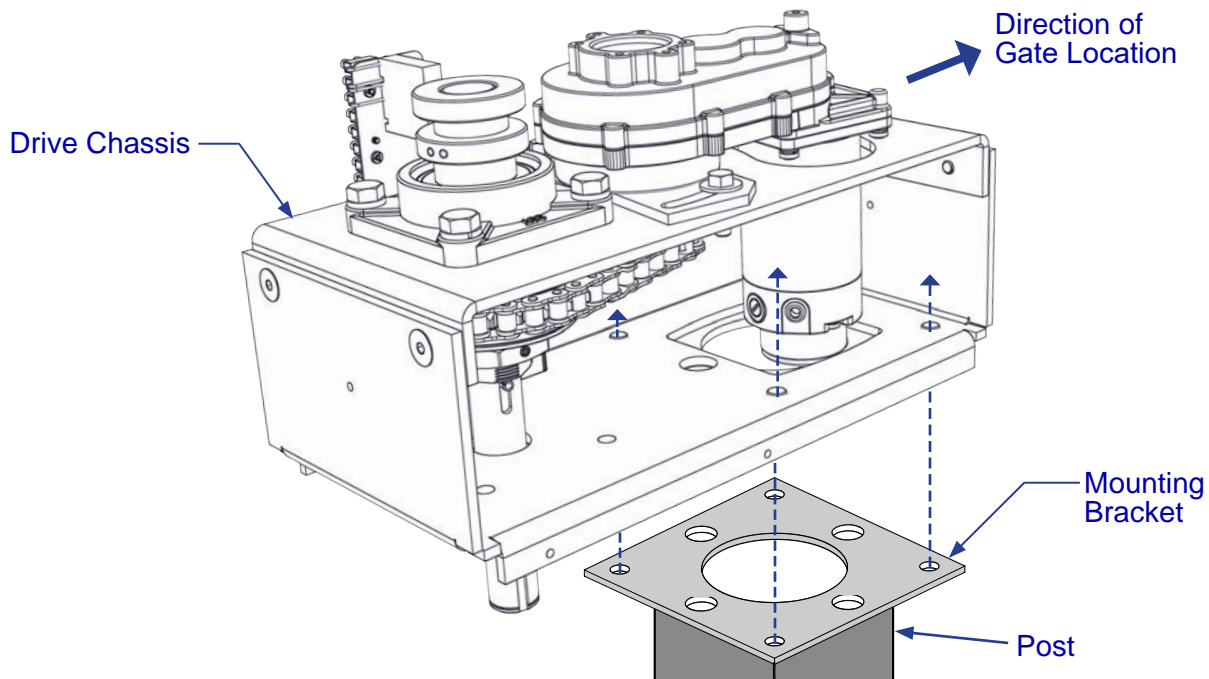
Mounting Chassis To Mounting Bracket
